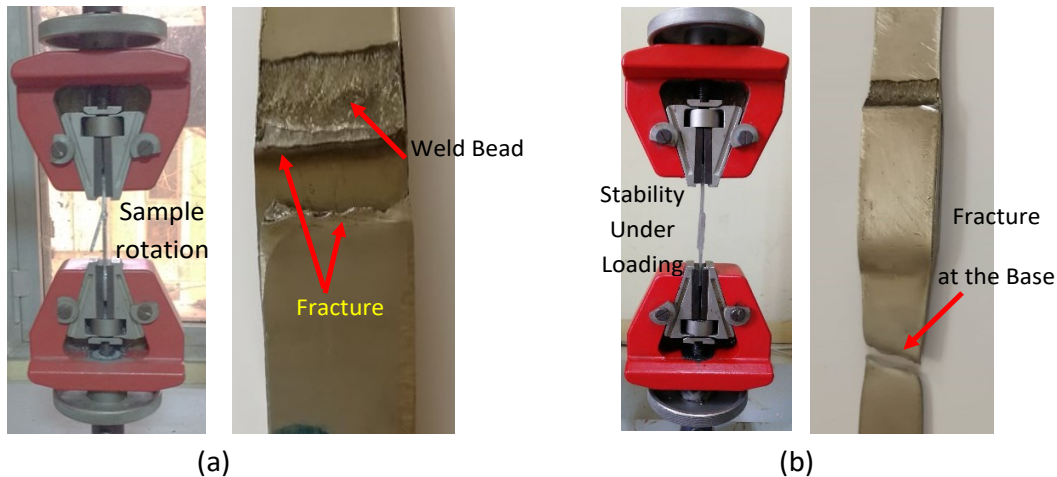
(a) Single Fillet Sample During Loading and Fractured Sample, (b) Double Fillet Sample During Loading and Fractured Sample.
